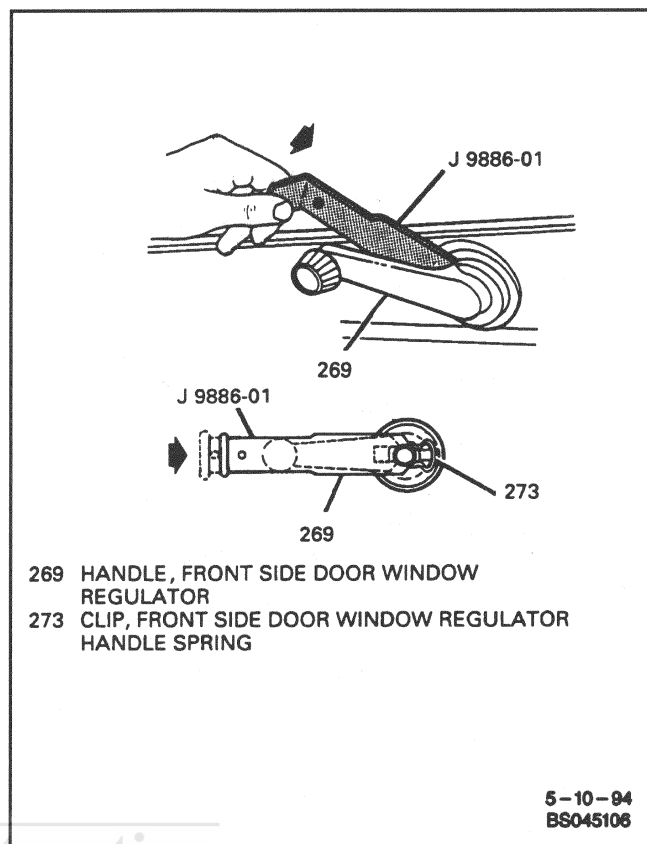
Removing Front Side Door Window Regulator Handle-(Chevrolet)
